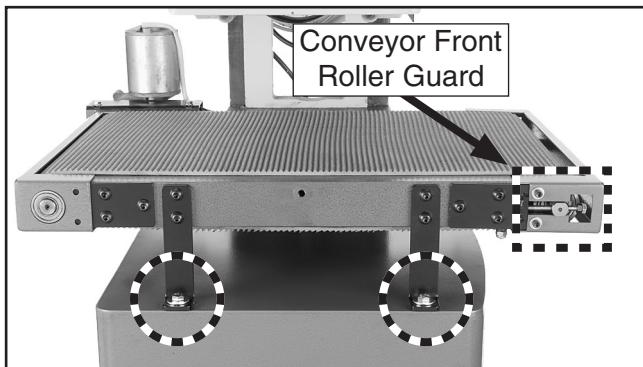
Mounting bolts and conveyor front roller guard (left side).
